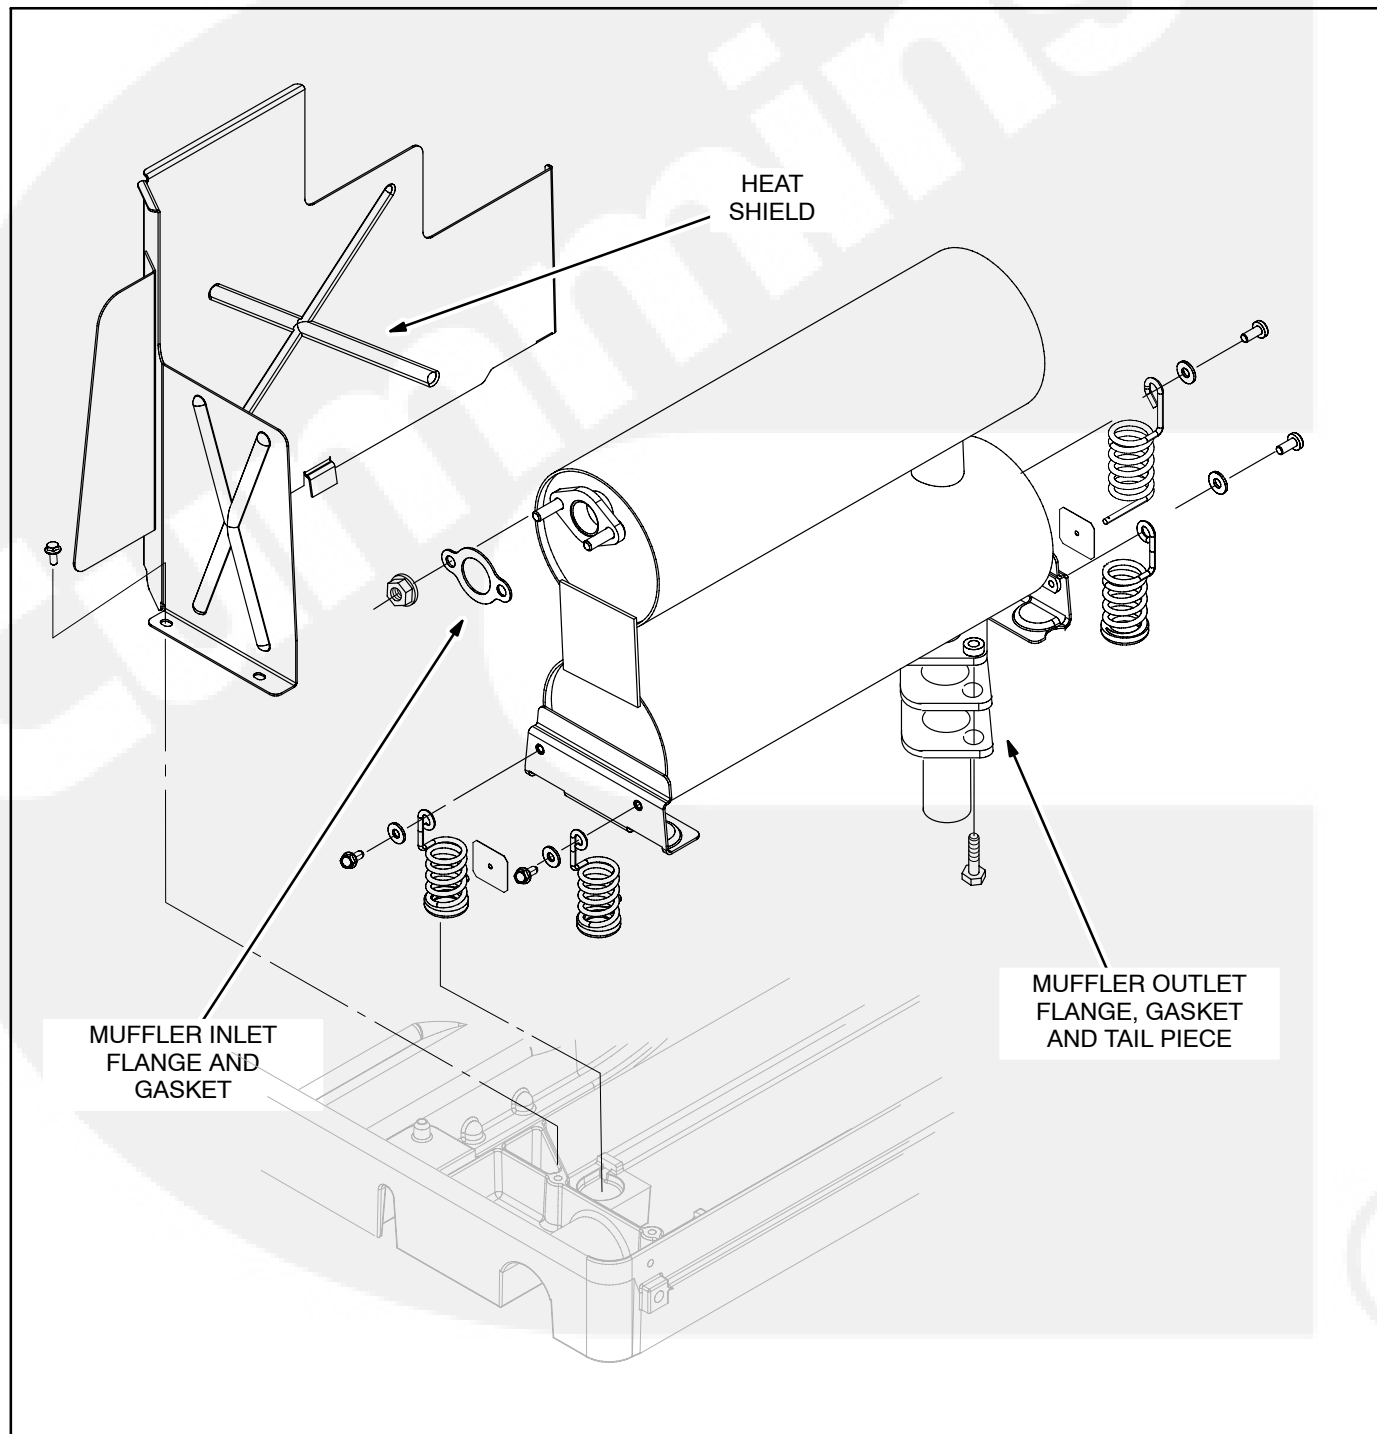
MODEL HGJAA, HGJAB, HGJAD, HGJAE MUFFLER
